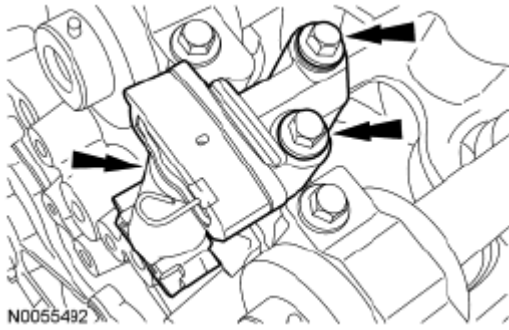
Locating LH Secondary Timing Chain Tensioner & Bolts
